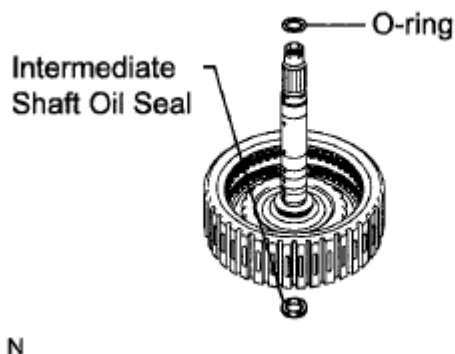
Identifying O-Ring And Intermediate Shaft Oil Seal
